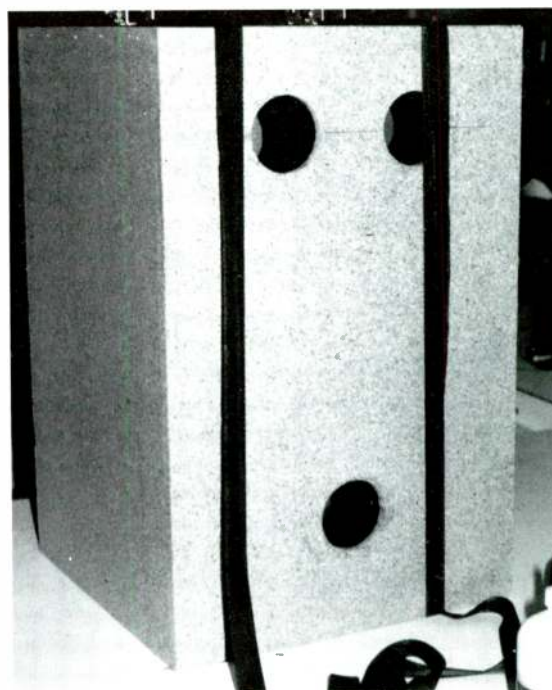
The T-Rex assembly taking shape, after gluing and clamping.
